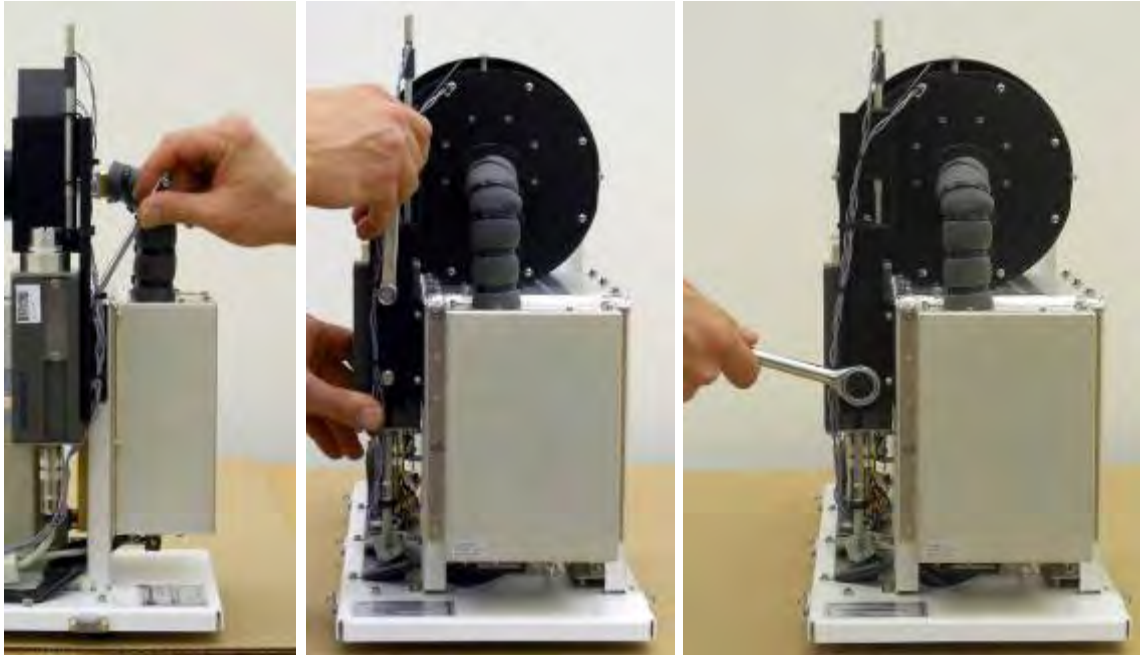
10mm wrench (left and middle) or socket head (right) to disconnect IRT from its bracket
